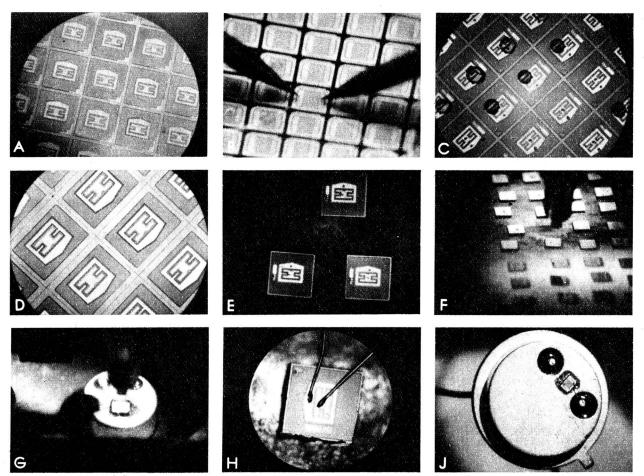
From wafer to assembled device. A-completed devices on wafer; B-probe testing; C-wafer showing inked rejects; D-wafer after scribing; E-separated dice; Fpicking up die for bonding; G—bonding of die to header; H—connecting wires (.001in) bonded to metallised pads on die; J—completed TO-5 metal can device prior to cap sealing. (Courtesy STC Components Division.)
